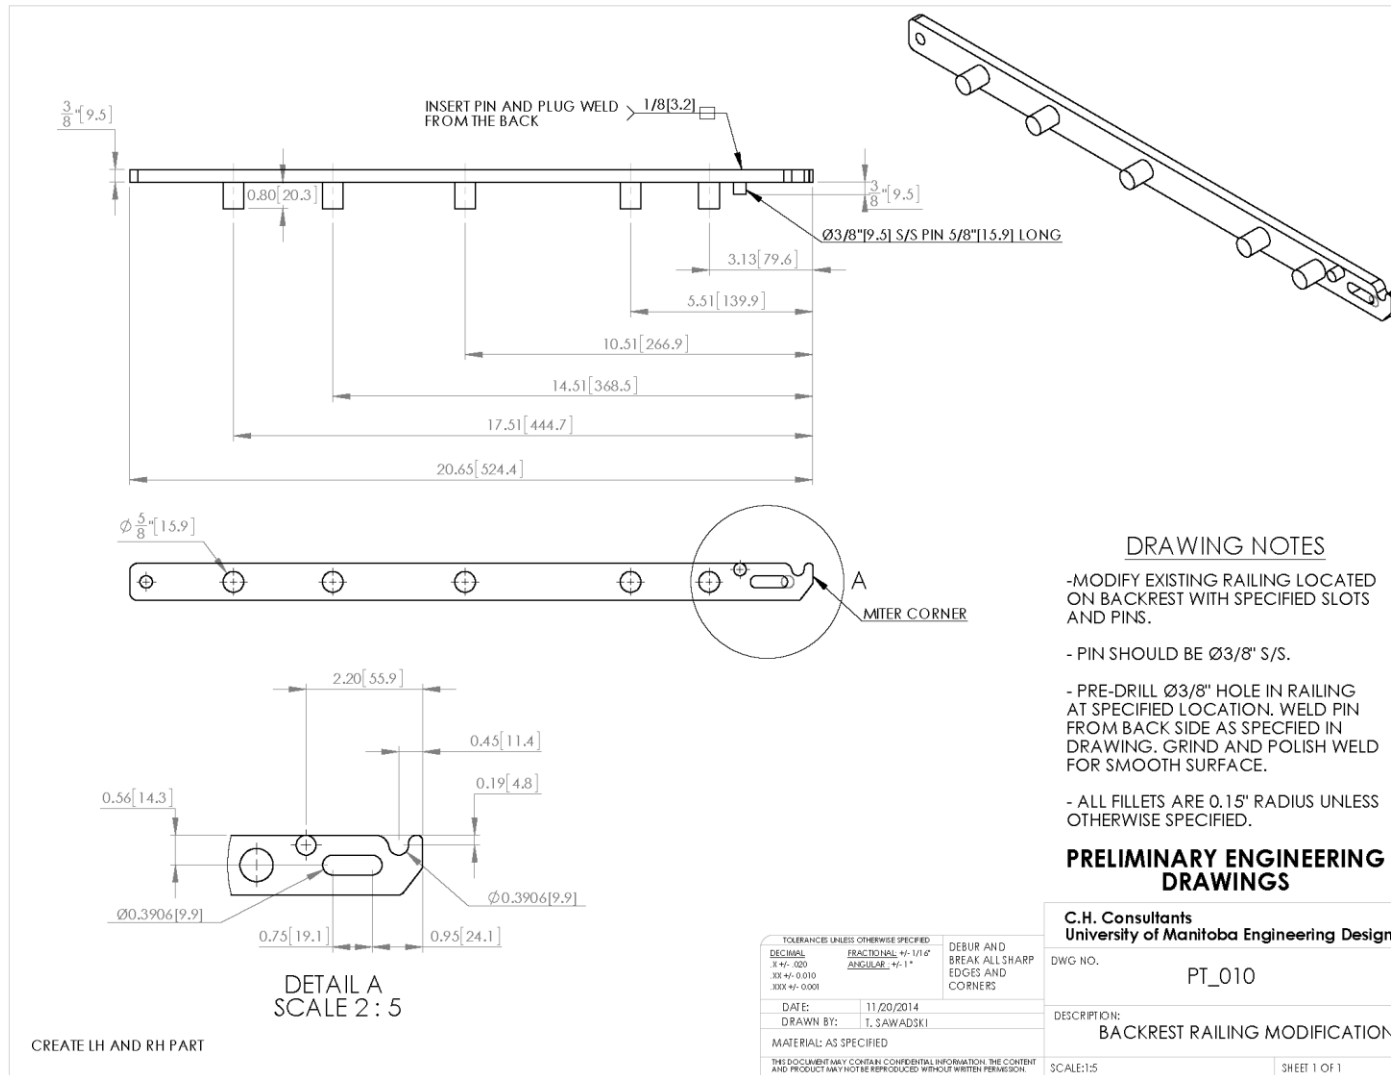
Preliminary engineering drawing for modifications to the backrest railings
